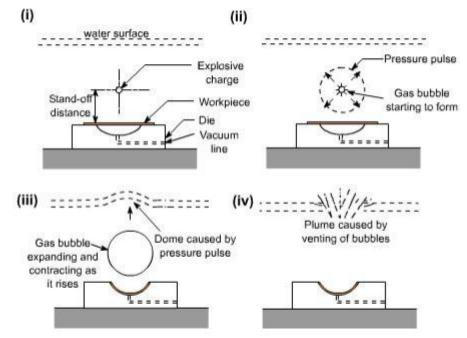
Sequeuce of underwater explosive forming operations.(i) explosive charge is set in position (ii) pressure pulse and gas bubble are formed as the detonation of charge occurs, (iii) workpiece is deformed, and (iv) gas bubbles vent at the surface of water.
